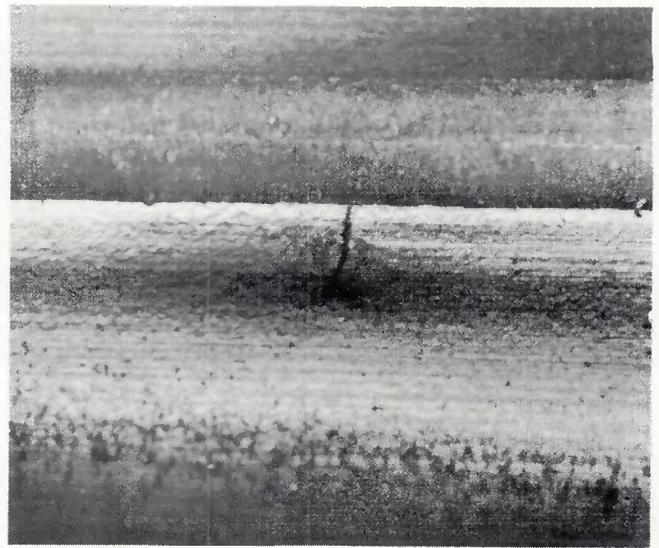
Heat-affected-zone cracking on the root side of a GTA weld in a 5/16-in. diam, 0.021-in. wall, alloy 800 welded tube. Cracking believed to be caused by copper contamination
